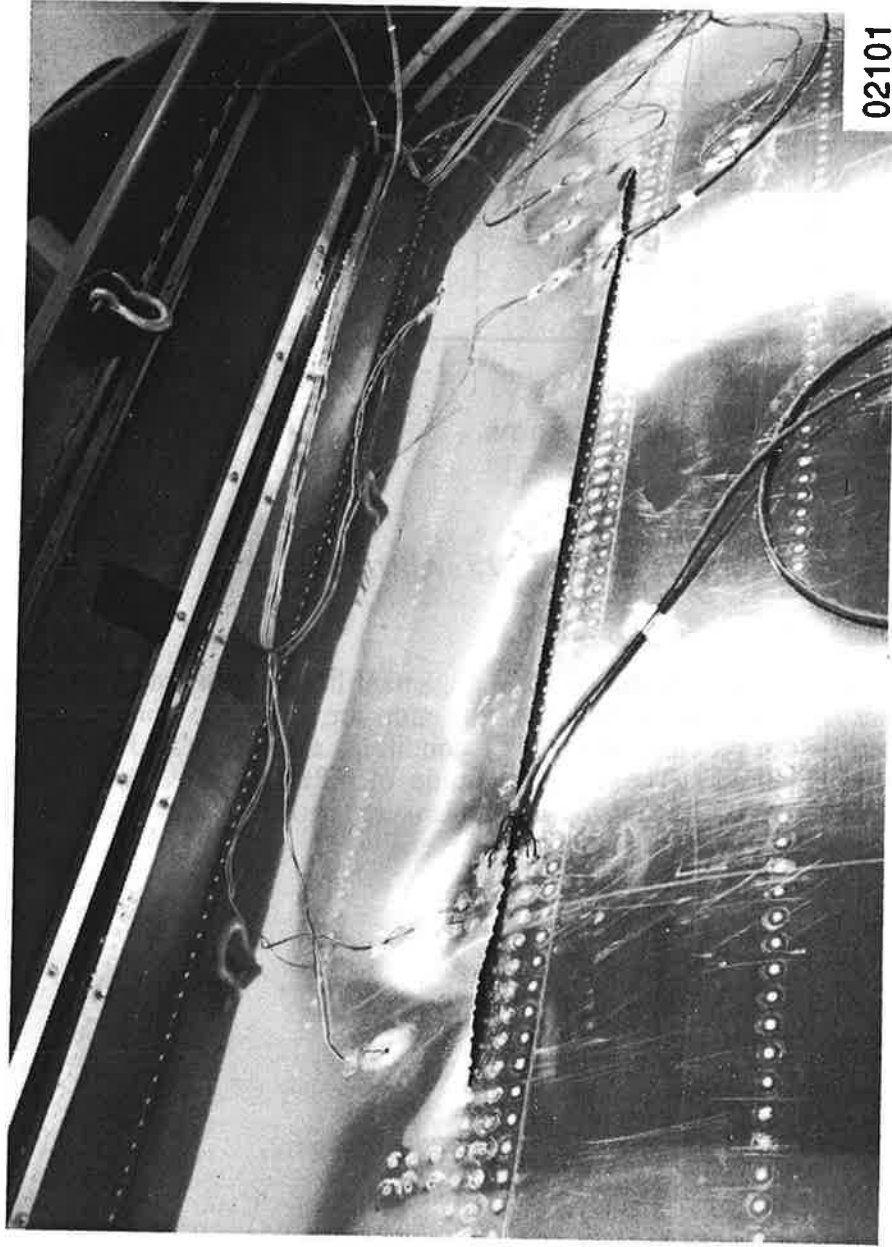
Panel 15: 35.36 in. Crack, No MSD - After Fracture
